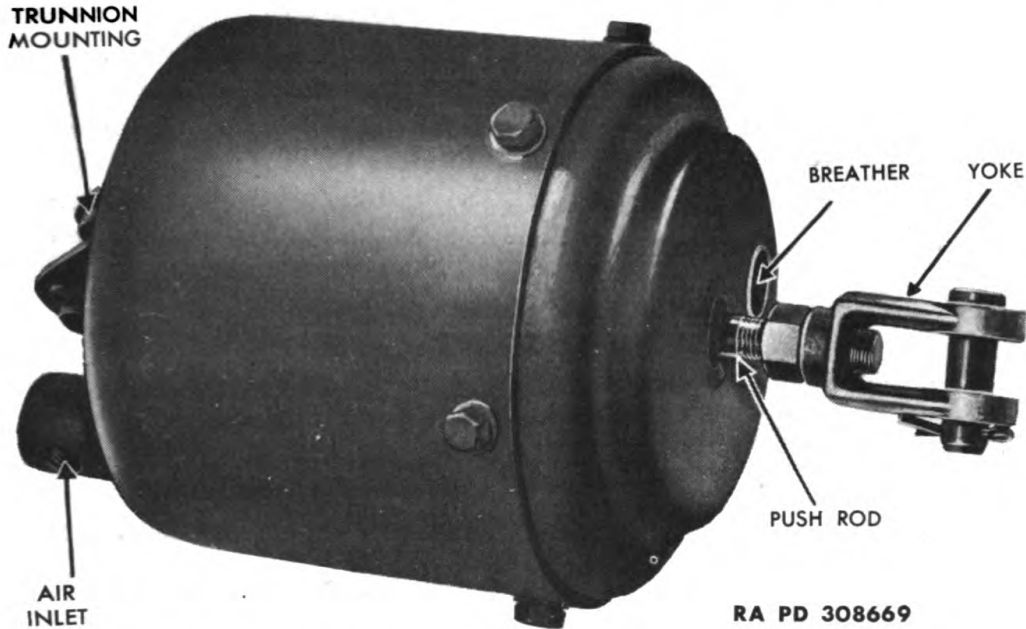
A 6-inch x 3-inch Brake Cylinder
